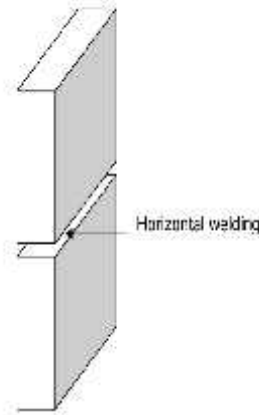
Scheme of placement of components to be welded for horizontal welding
